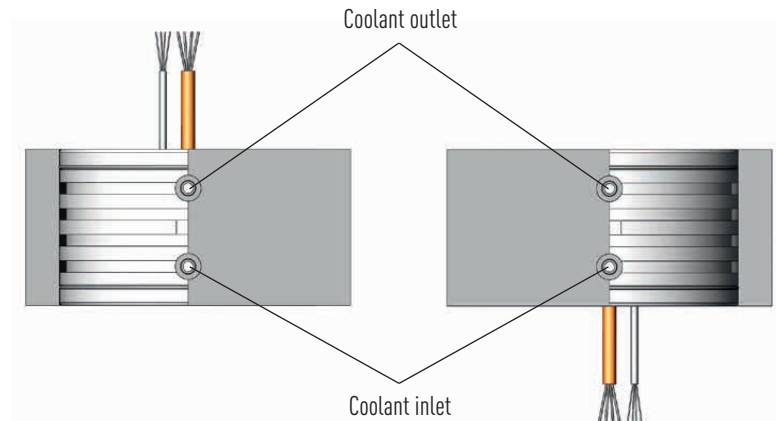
Coolant inlet and outlet in horizontal mounting position
